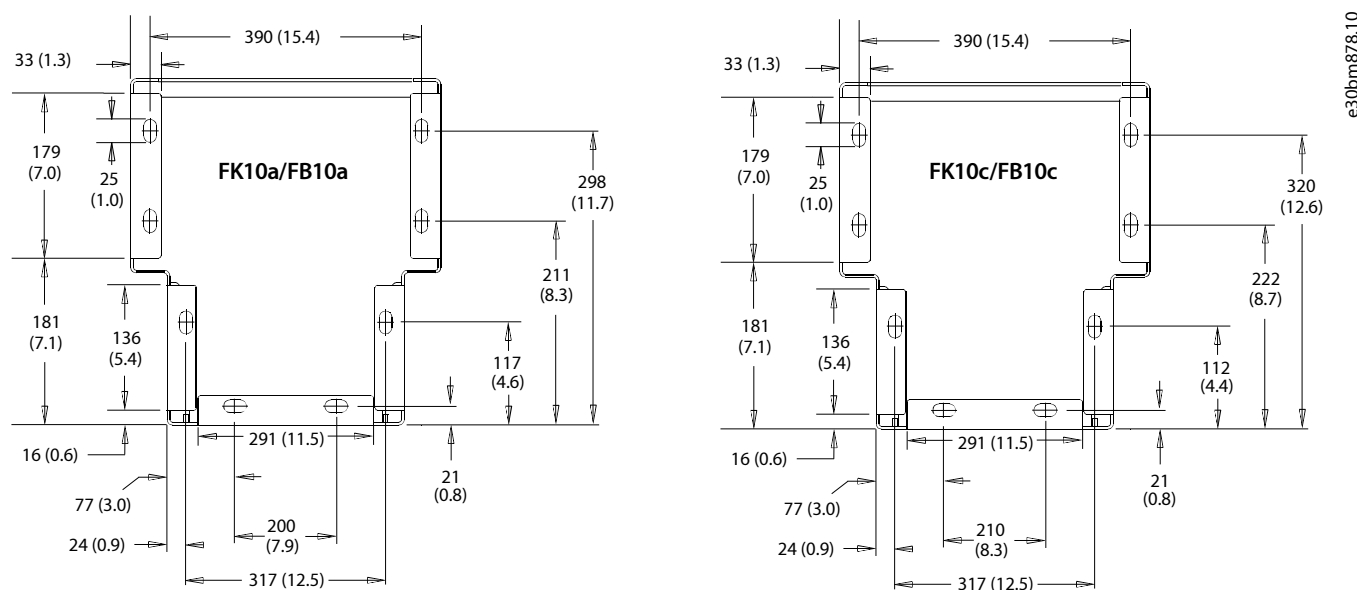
Dimensions for Pedestal Mounting Holes (FK10/FB10 Frames)
